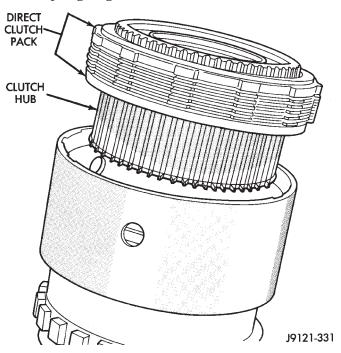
Installing Assembled Direct Clutch Pack And Hub
